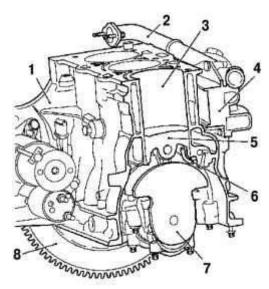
Cooling of the piston: 1 - the engine block, 2 - pipe cooling system, 3 - cylinder walls, 4 - oil cooler 5 - piston, 6 - oil spray atomizer; 7 - crankshaft 8 - Flywheel
